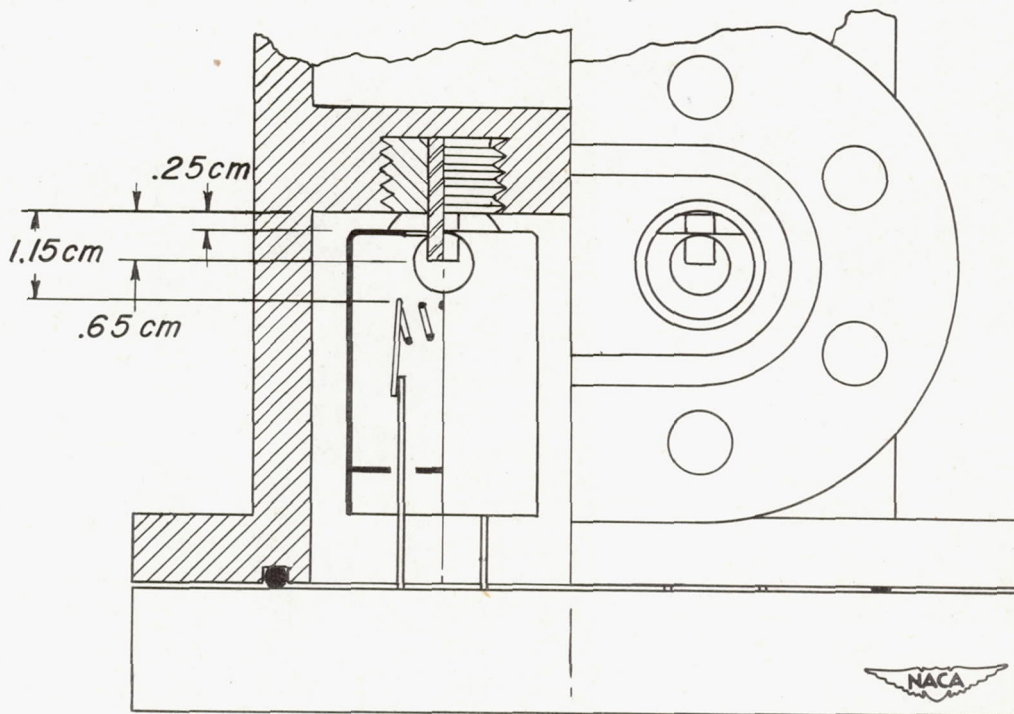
Cross-sectional drawing, final model of X-ray tube.
